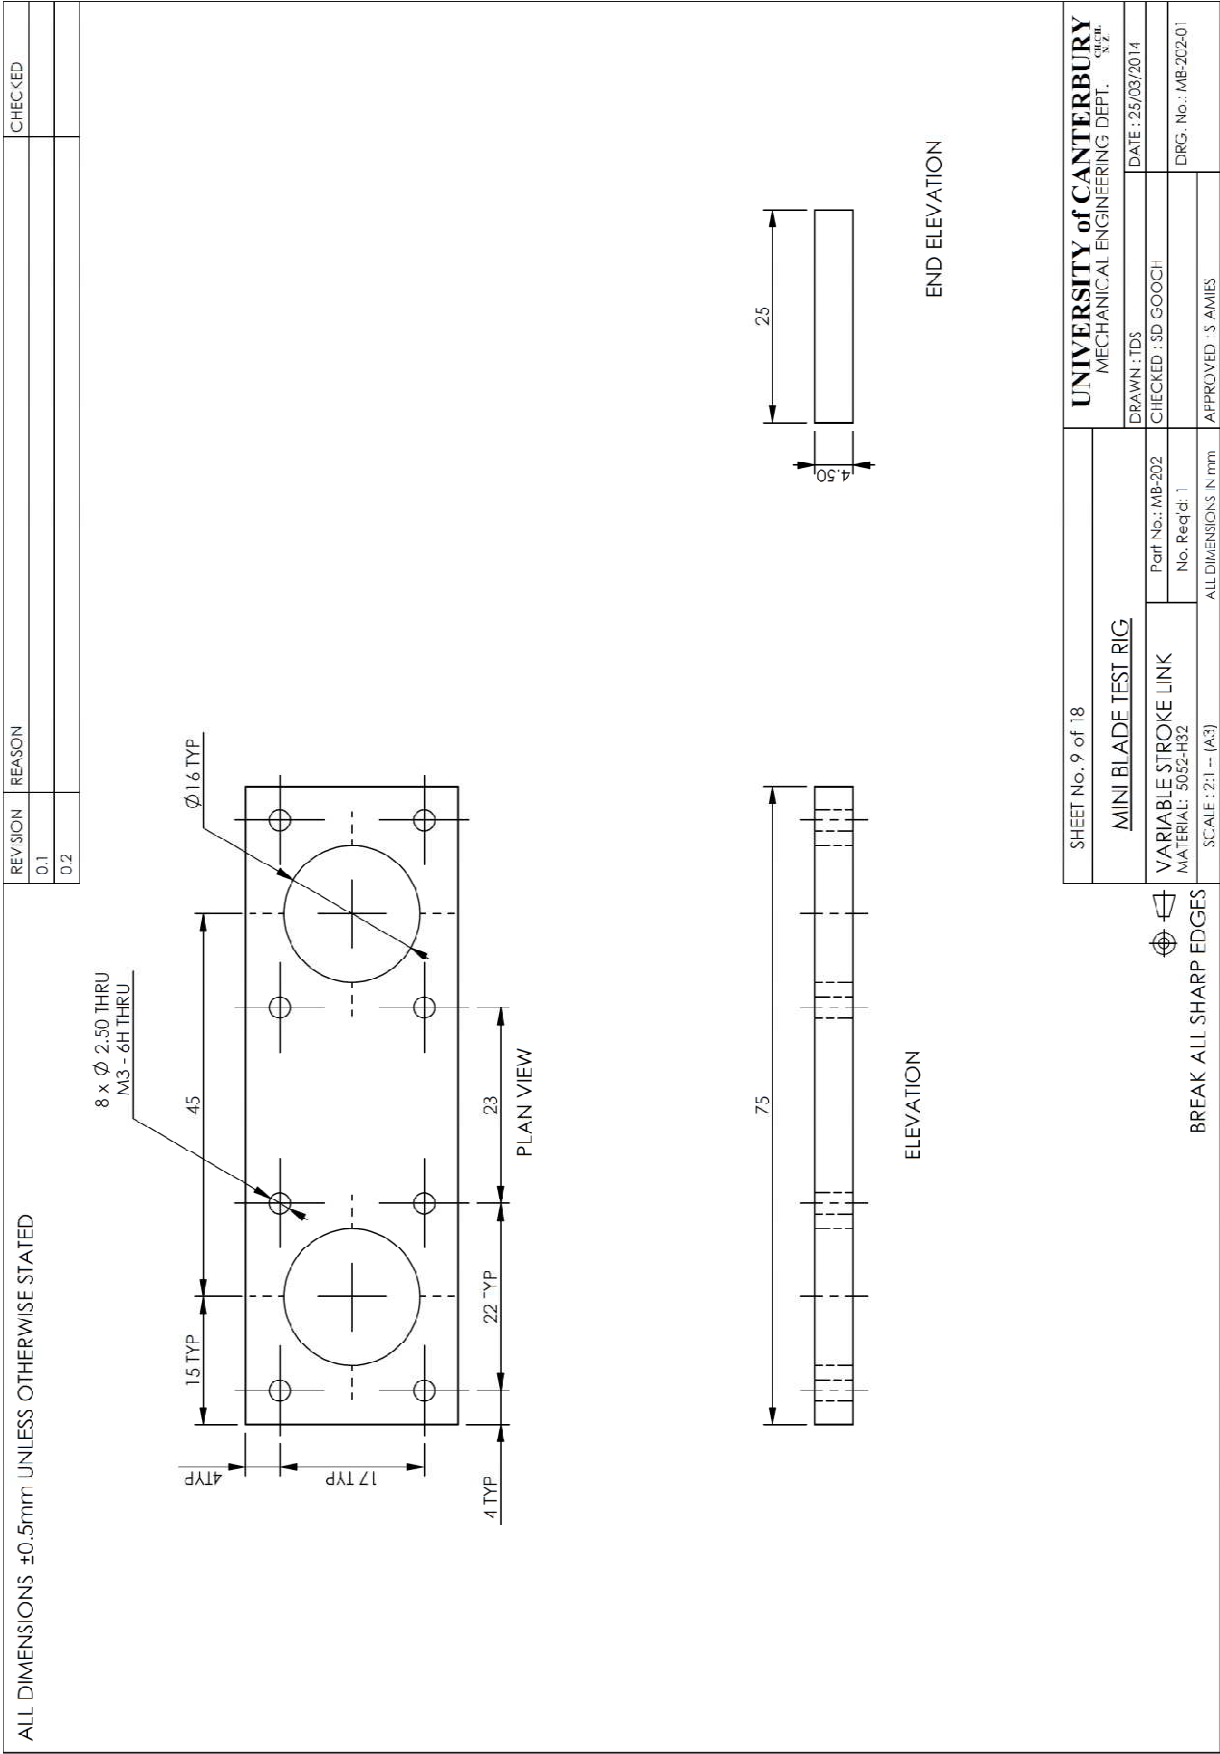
Manufacturing drawing for link 2 of the variable stroke test rig.
